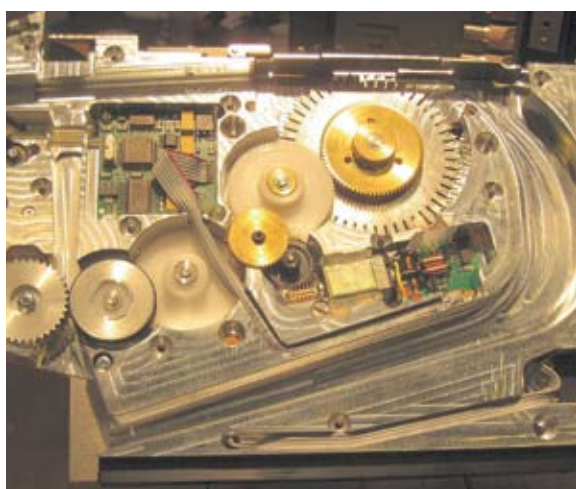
An SMD-parts feeder assembly formerly produced in China, now by Wilting Components.
